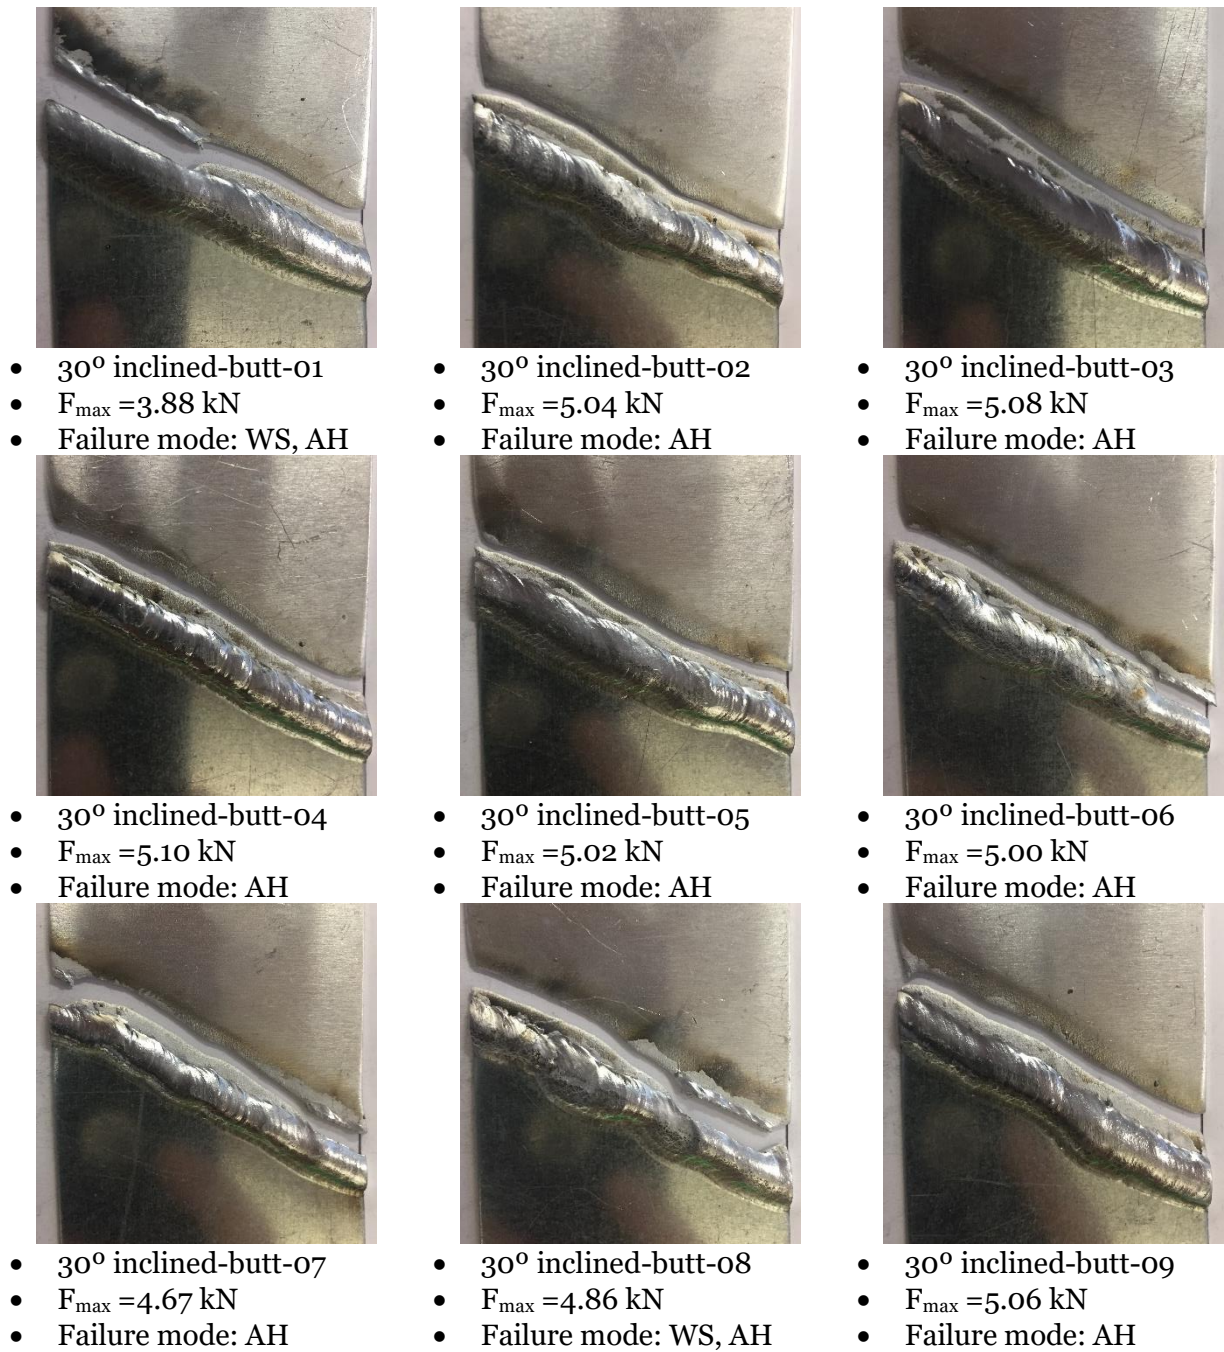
Tensile static failure of 30° inclined butt-welded joints (short-term).
